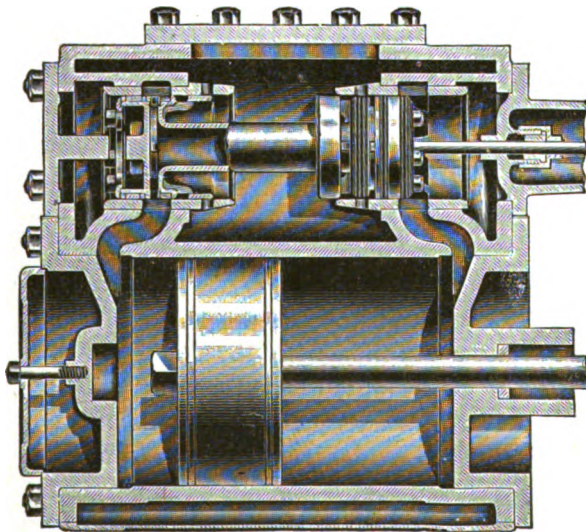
The Cylinder and Valve of Armington & Sims Engine.
